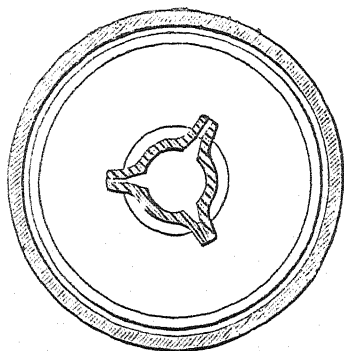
"The Farmer's Surprise" Cream Separator. Sectional plan through bowl and central tube, showing slots in projecting wings.
